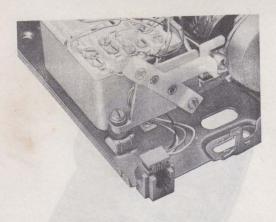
554B2M Telephone Set Base With Handset Jack Installed
